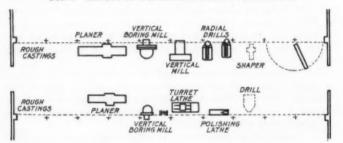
LAYOUT OF DEPARTMENT FOR TURRET AND SADDLE MACHINERY
